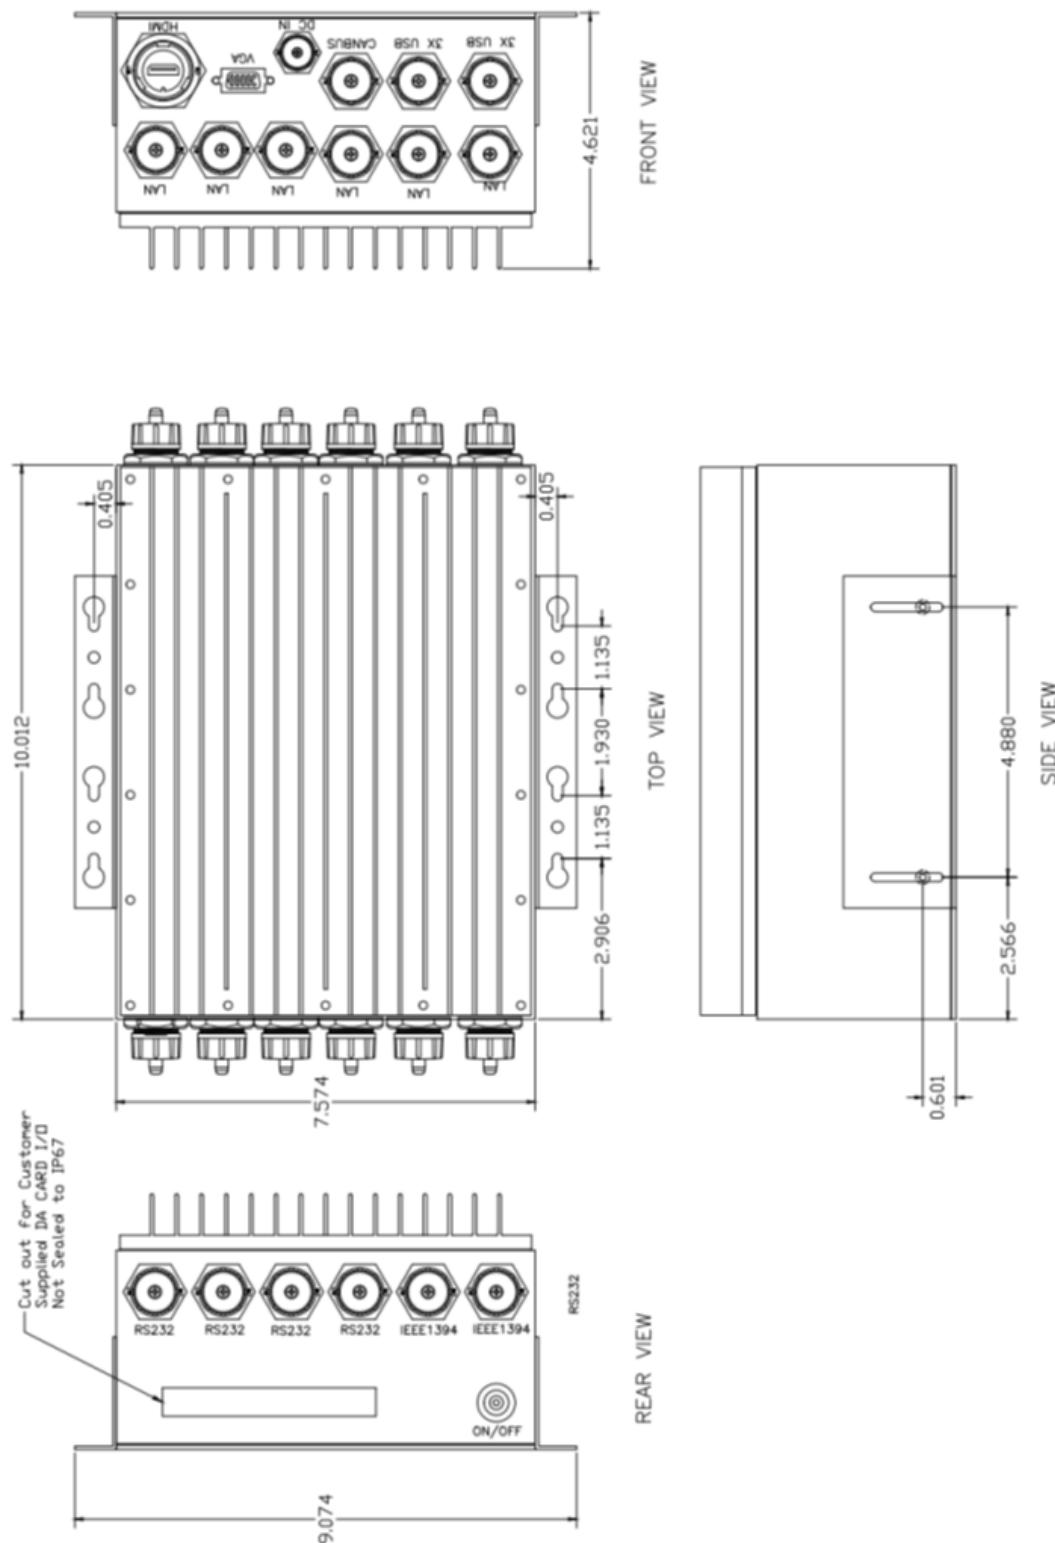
Computer (Option 3): SC240ML-i724 technical drawing (in inches)
